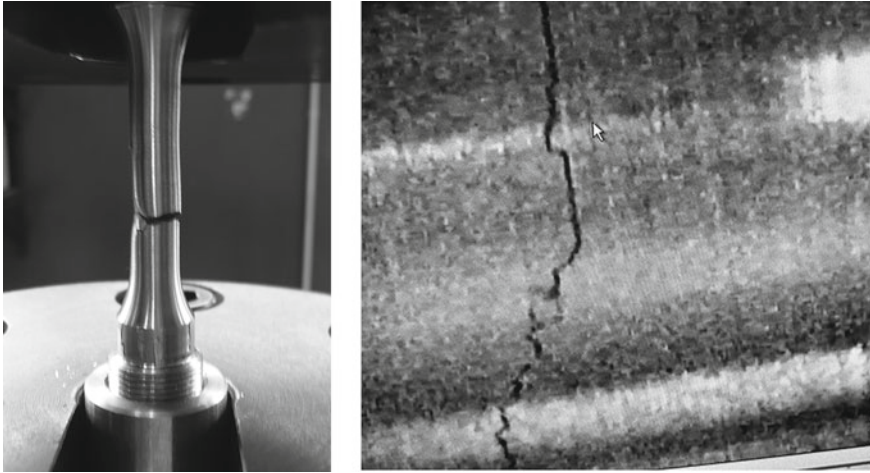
Total fracture and first crack in a specimen axially loaded in low cycle fatigue
